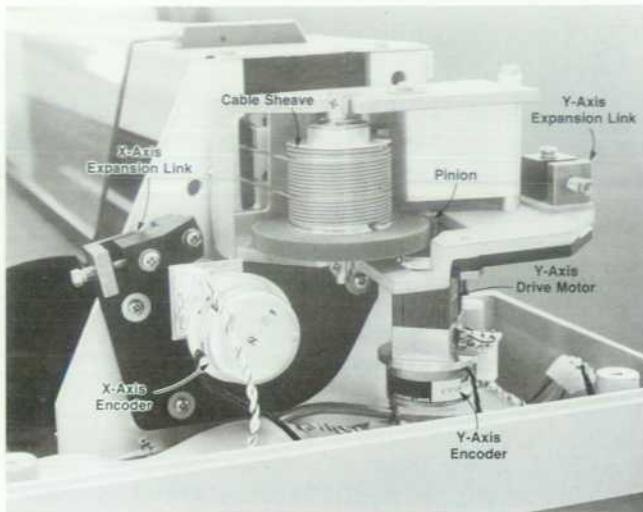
Delrin™ expansion link assembly. This design, indicated by the arrows, compensates for the difference in thermal expansion rates between the aluminum and Delrin gears used in the drive motor systems. Note the small size of the drive motors.
